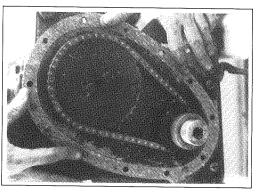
Ensure that all traces of the old gasket are removed then fit a new one. Refit the oil thrower and oil seal sleeve.
